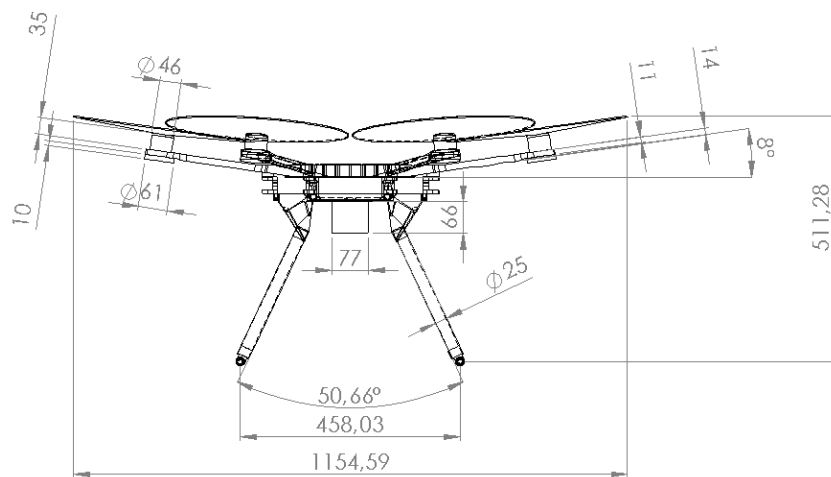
drone front view with landing gear, motors, ESC and battery dimensions
